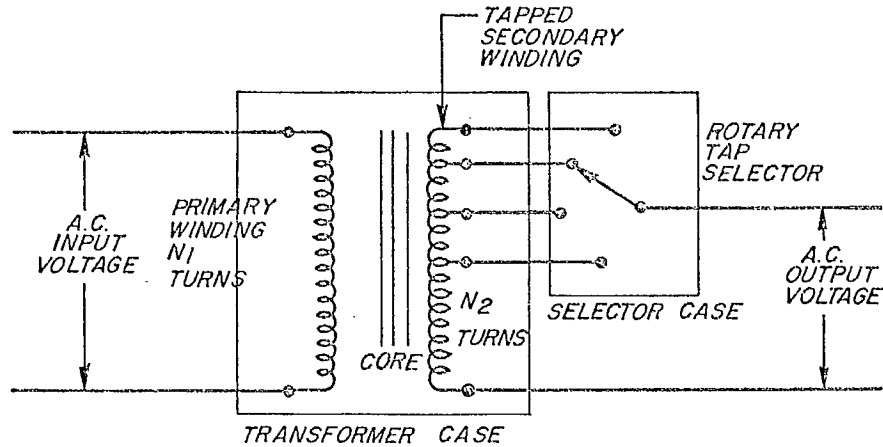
Welding transformer with tapped secondary winding to control no-load output voltage
